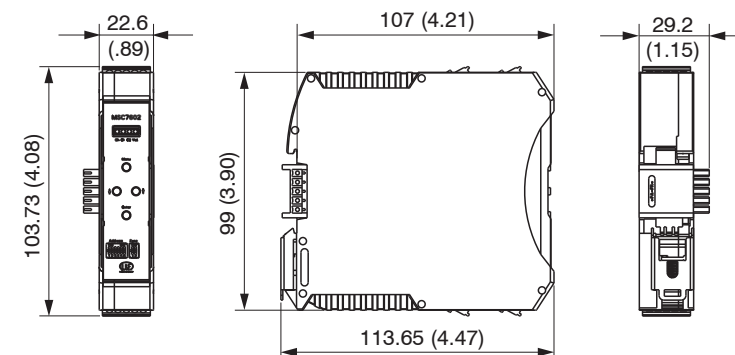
Dimensions of MSC7602 controller, dimensions in mm, not to scale
